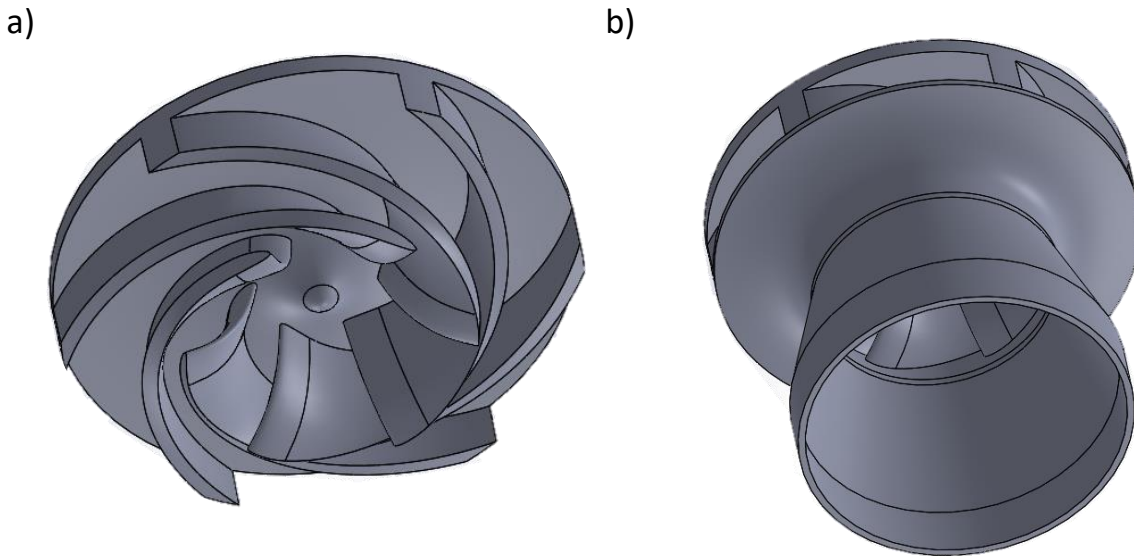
Impeller design. (a) hidden shroud, and (b) with shroud.
